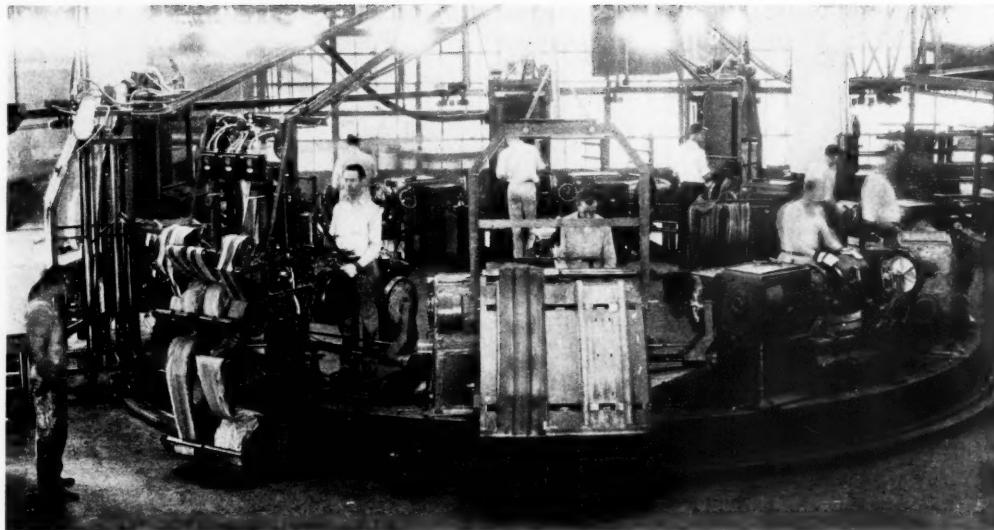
View of "Merry-Go-Round" Showing in Front Tread Application Zone
